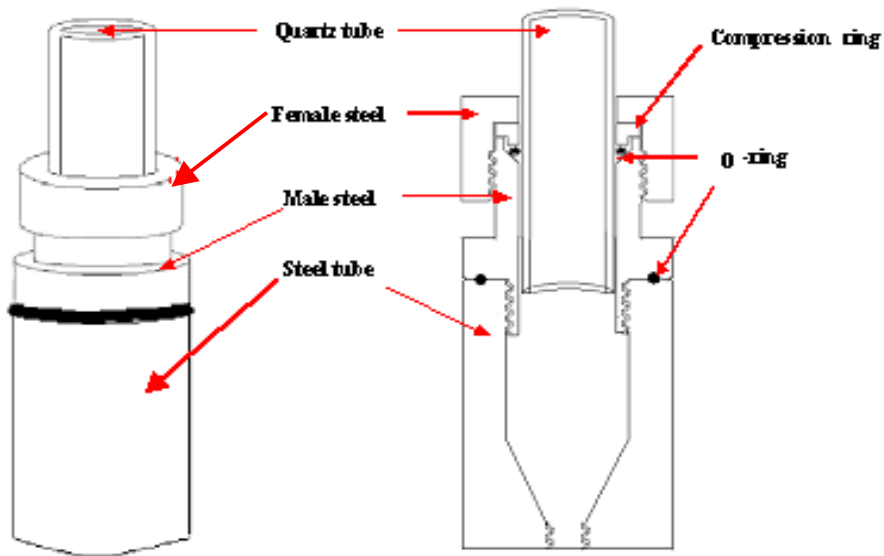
Schematic of improved quartz tube holder and steel base experimental apparatus.
